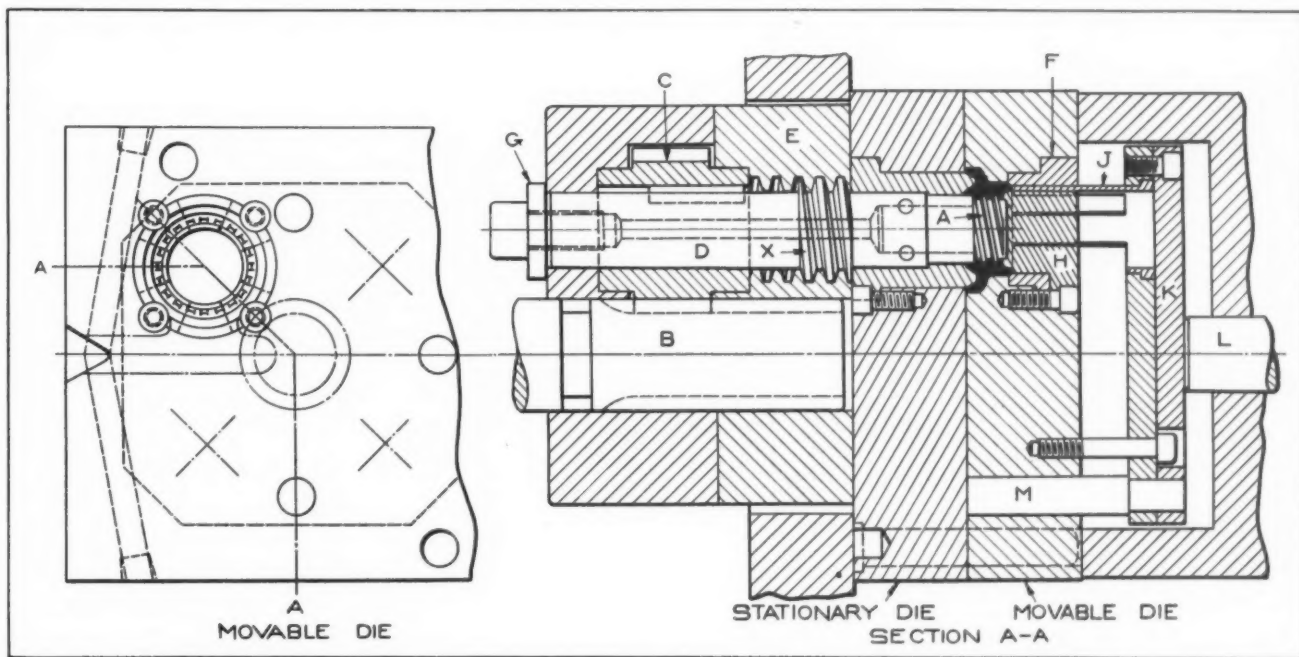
(Above) Four Shafts *D* with Lead-screws Withdraw the Cores Used in Casting the Threaded Nut Shown in Fig. 9
